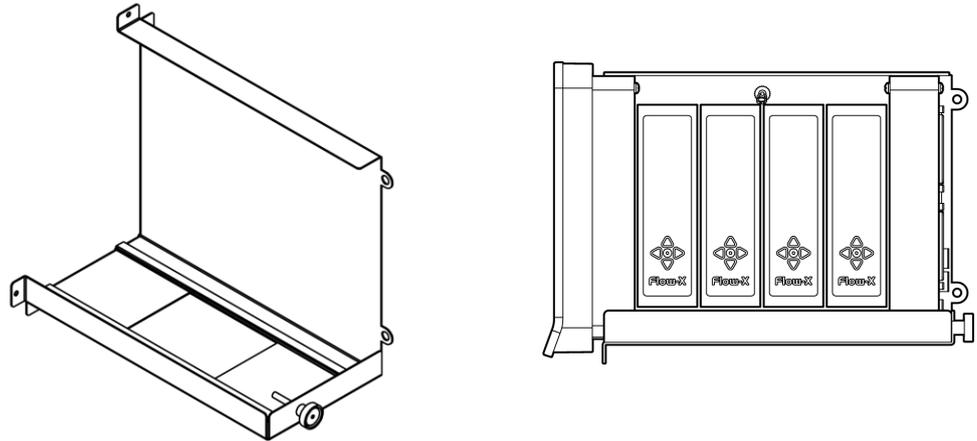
Flow-X/P mounting bracket and side view Flow-X/P installed
